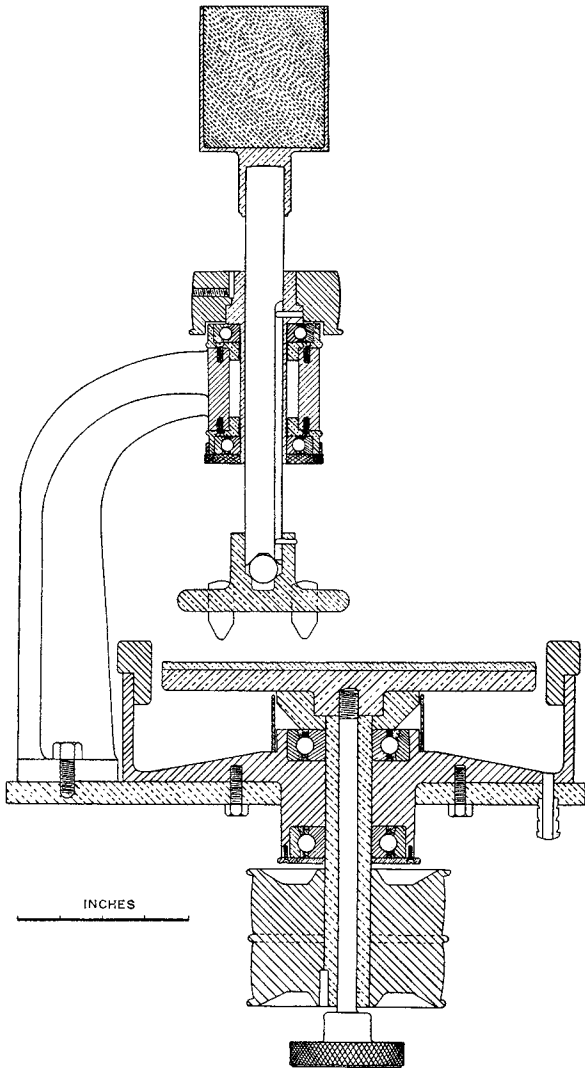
Universal ore-polishing machine. Part-sectional elevation of lap and head for automatic polishing.
